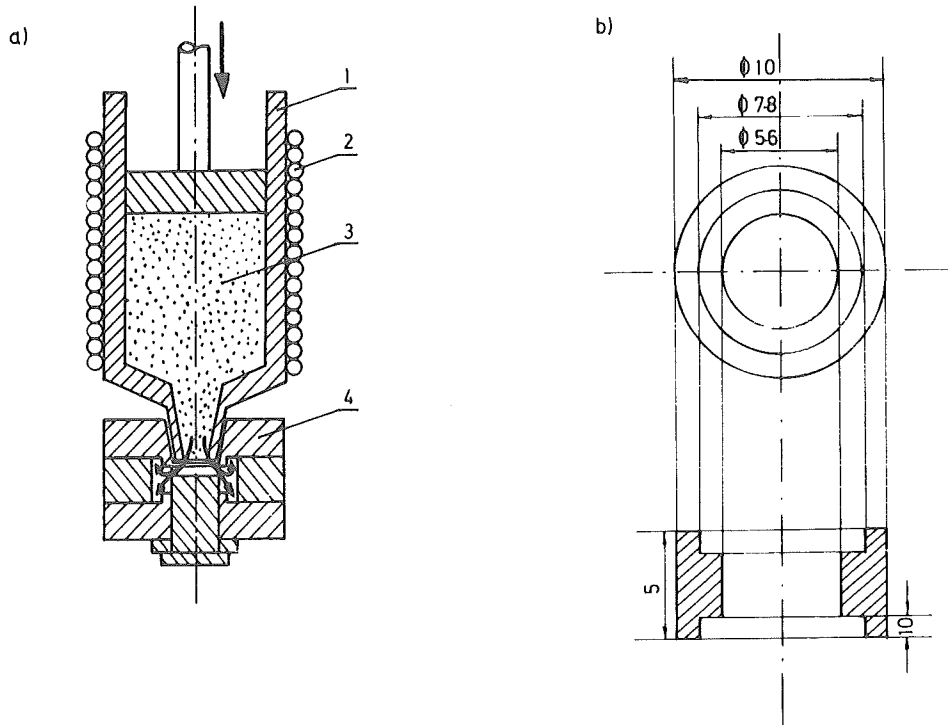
a) Laboratory injection moulding schematic. 1 - veterinary injection syringe, 2 - water heating coil, 3 - ceramic slip, 4 - metallic mould assembly
